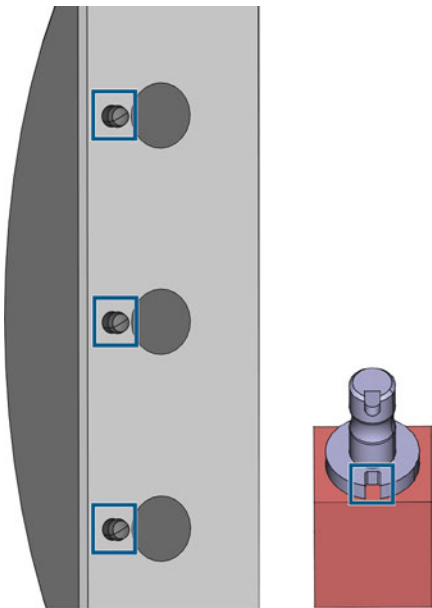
POSITIONING PINS (LEFT MARKINGS) MUST LIE IN THE GROOVE IN THE SHAFT (RIGHT MARKING)
